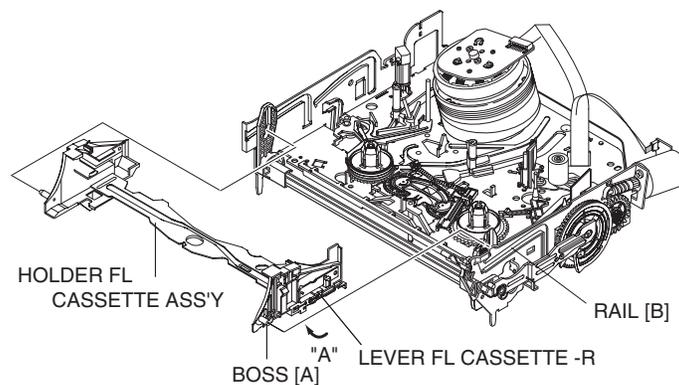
Holder FL Cassette Ass'y Removal
